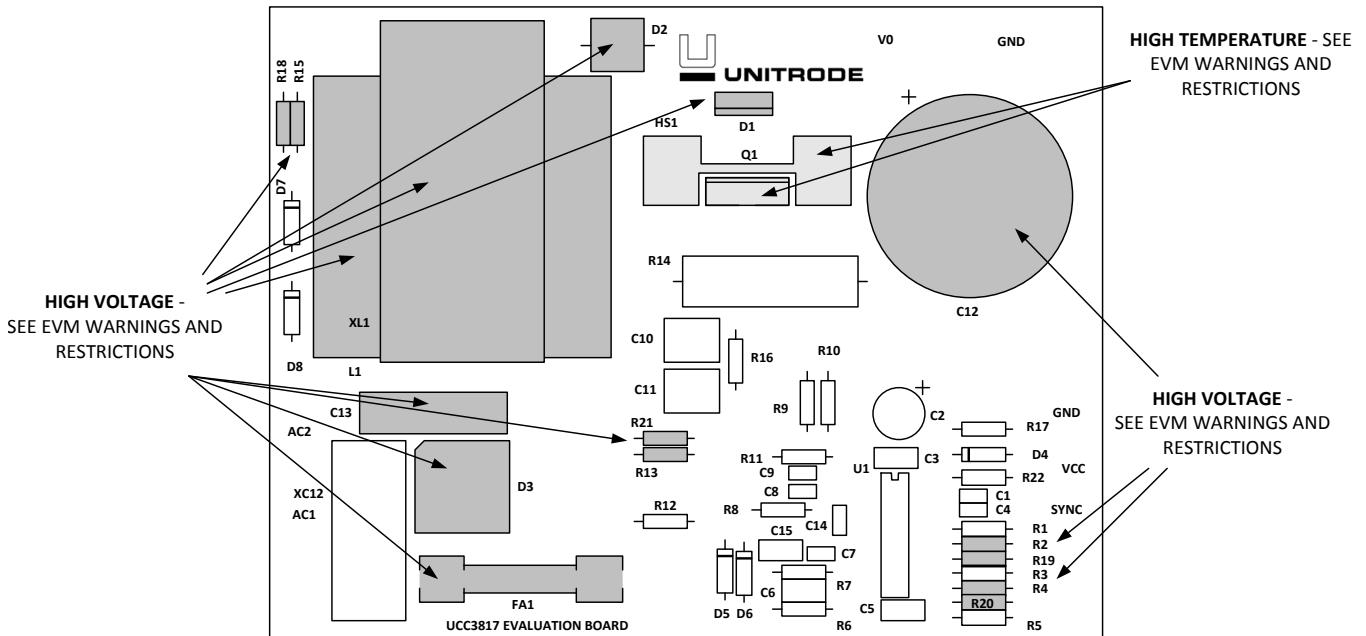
UCC3817EVM Evaluation Board Layout Assembly
